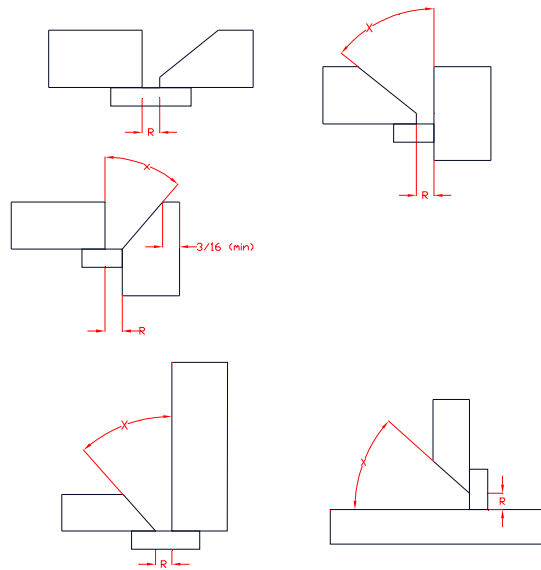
Single-bevel groove joints for welding one with backing.
